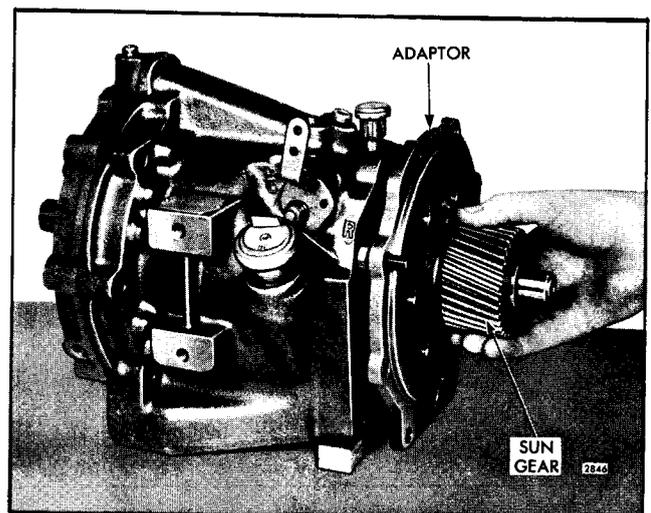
Removing or Installing Reduction Gear Adaptor and Sun Gear Assembly from/to Reverse Gear Housing (2.1:1 Ratio)
